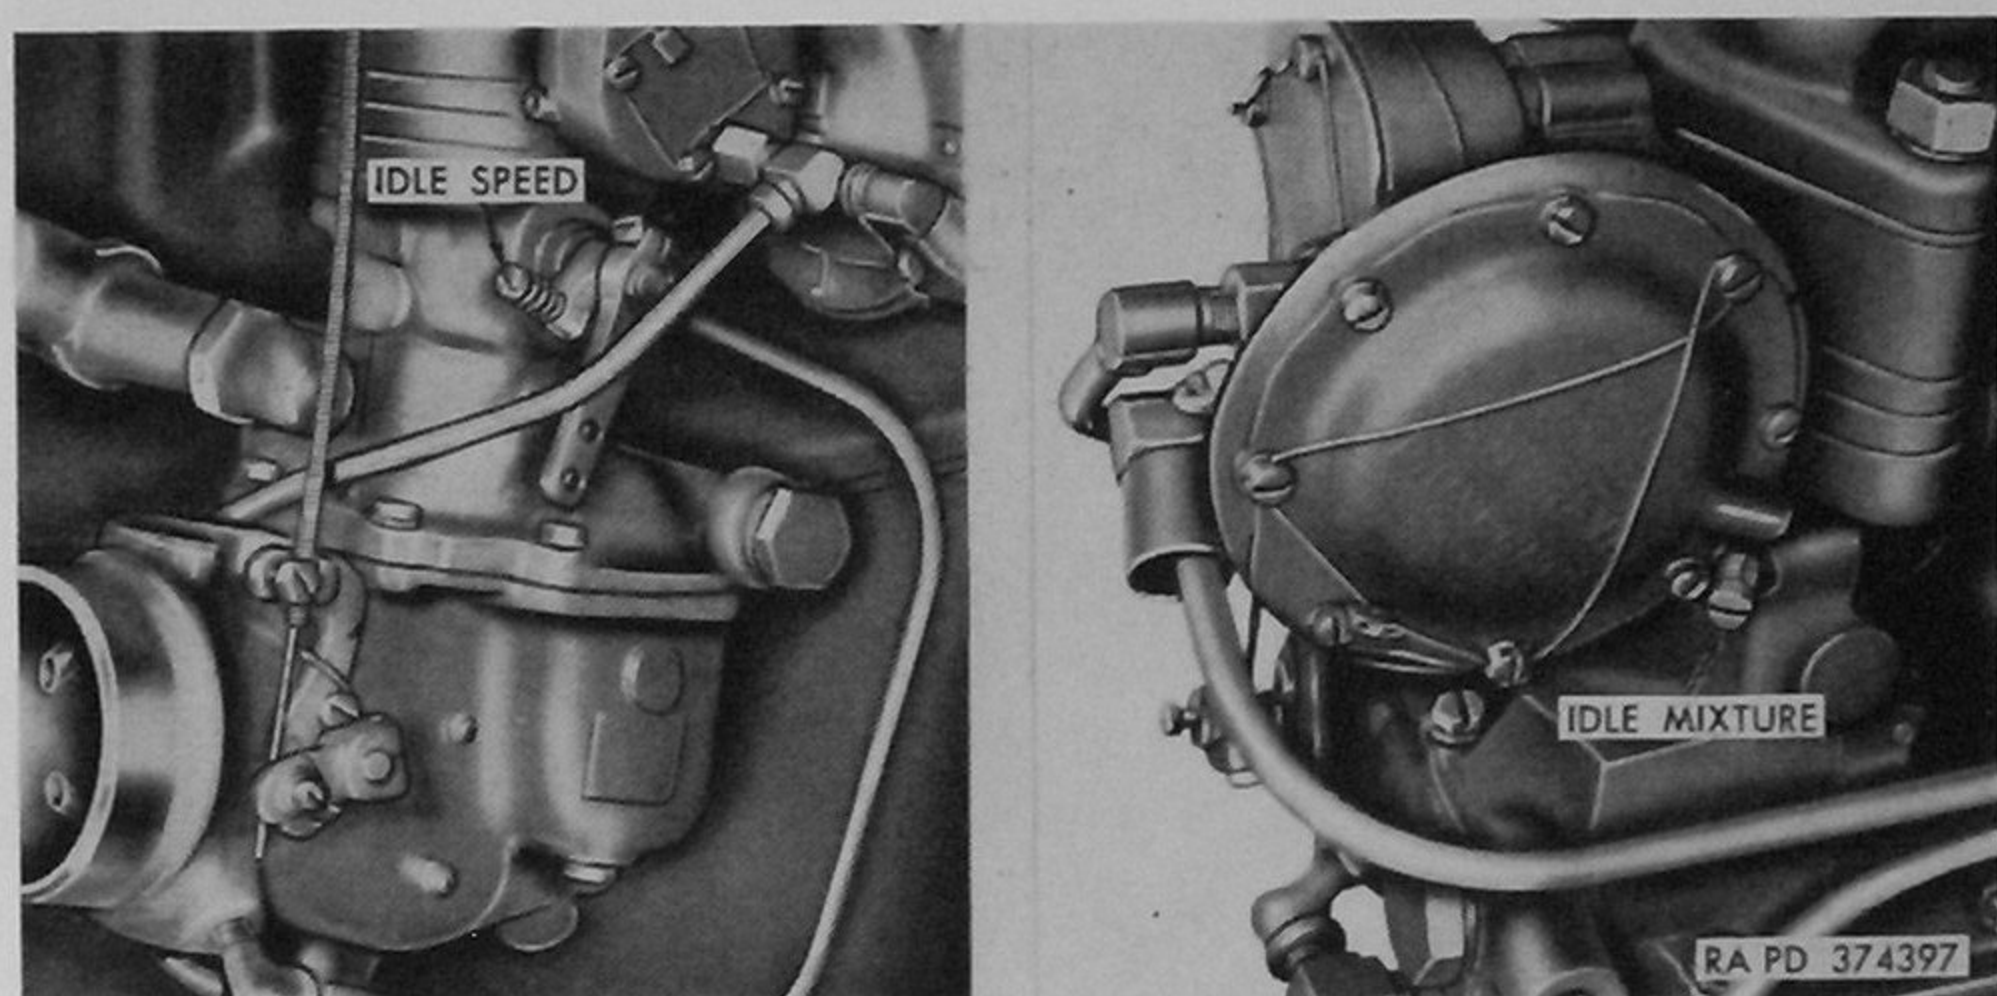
Location of carburetor idle speed and mixture adjusting screws—engine assembly 8726920.
